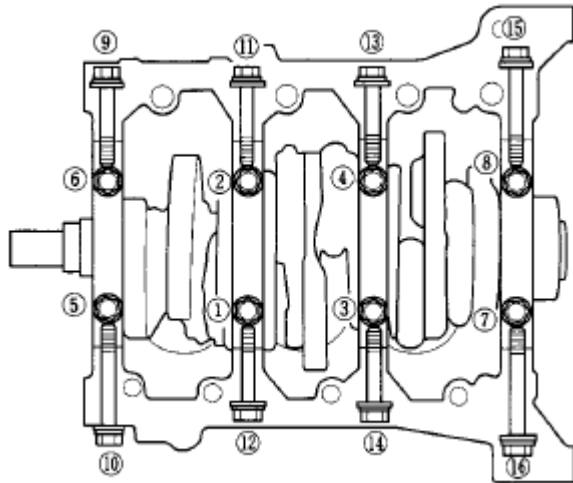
Identifying Main Bearing Cap Bolts Tightening Sequence
